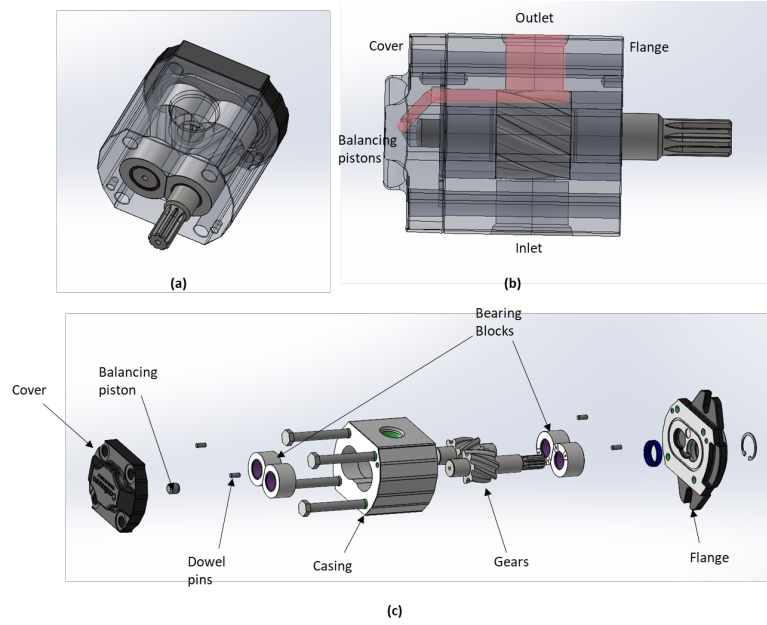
Reference CCHGP. (a) 3D CAD of the pump; (b) axial compensating system of the pump; (c) exploded view of the components.
